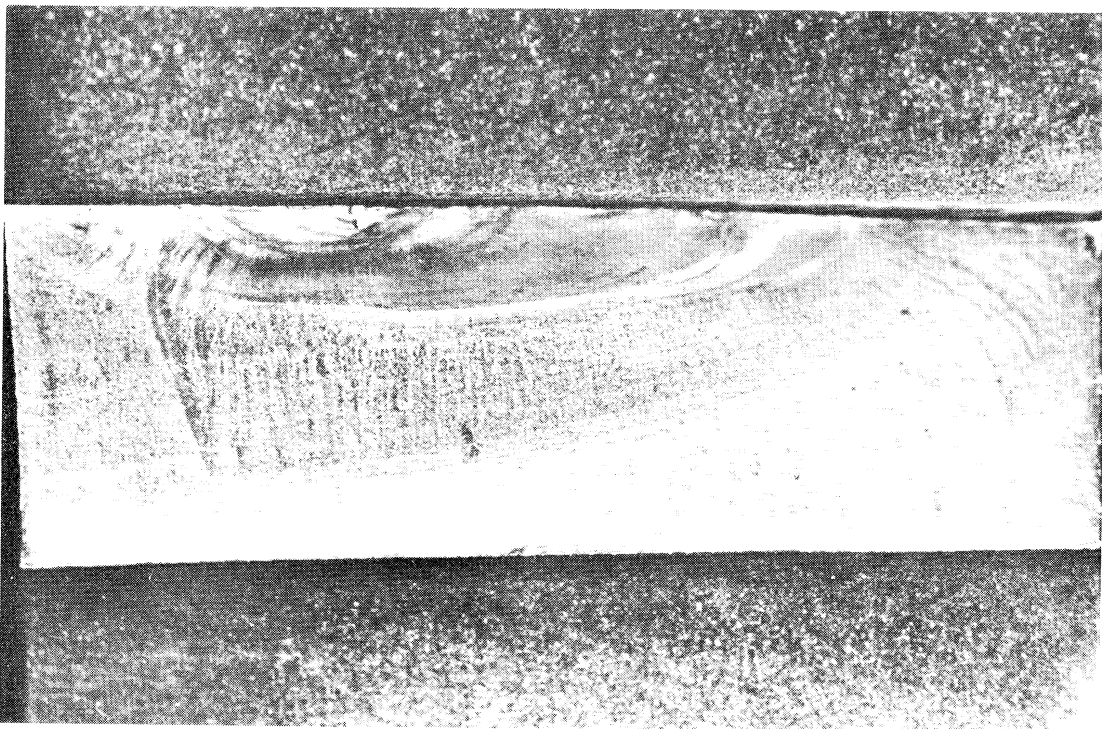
View of fracture surface in Figure 15. Magnified 6 diameters.
